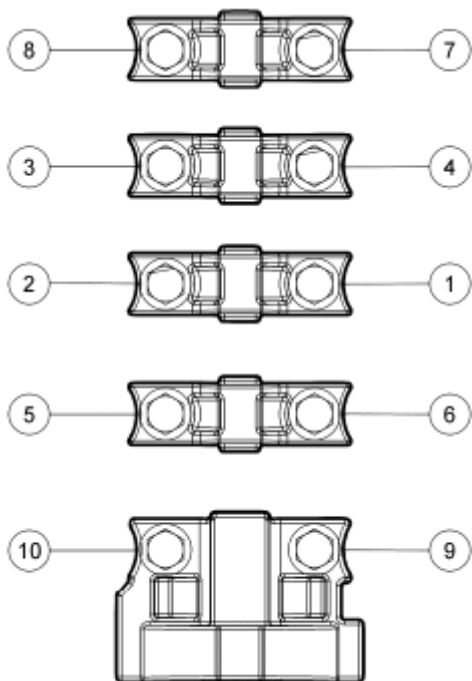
Identifying Camshaft Bearing Cap Bolt In Sequence
